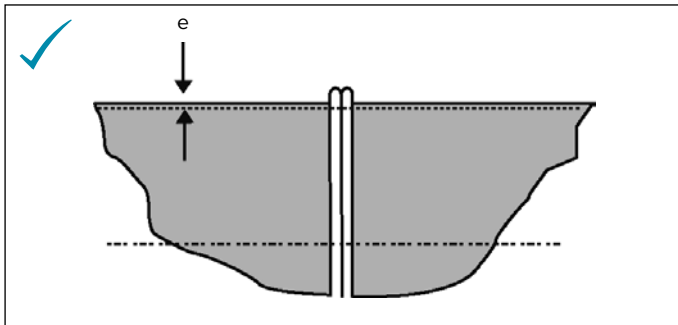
Butt-weld with even welding beads (acceptable)
